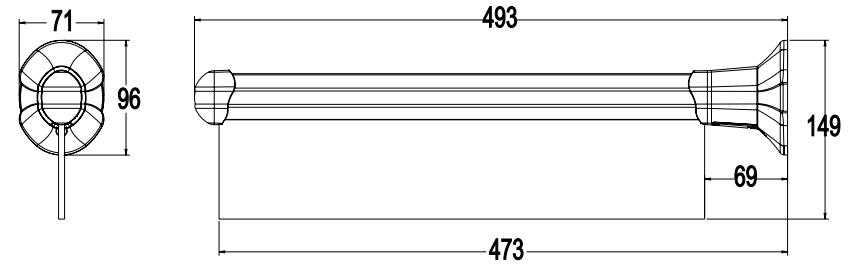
LD-40E1 Style Sign Dimensions (mm)
